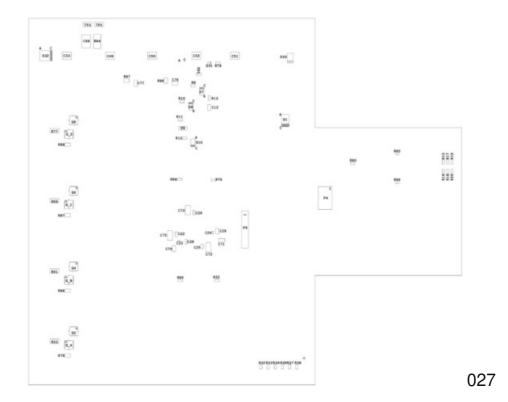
EVAL-AD74416H-ARDZ Assembly Diagram, Bottom View
